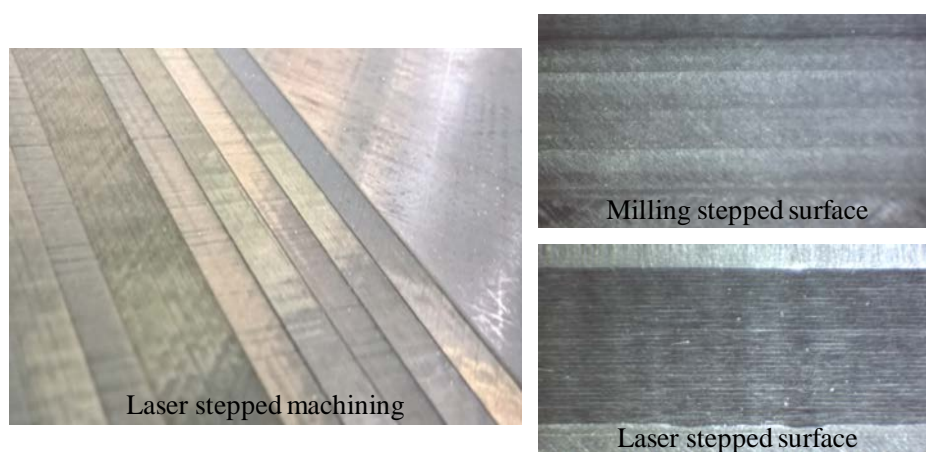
On the left an example of a stepped lap material removal on composite plate is presented. On the right the surface quality of milling and laser stepped surfaces are presented.
